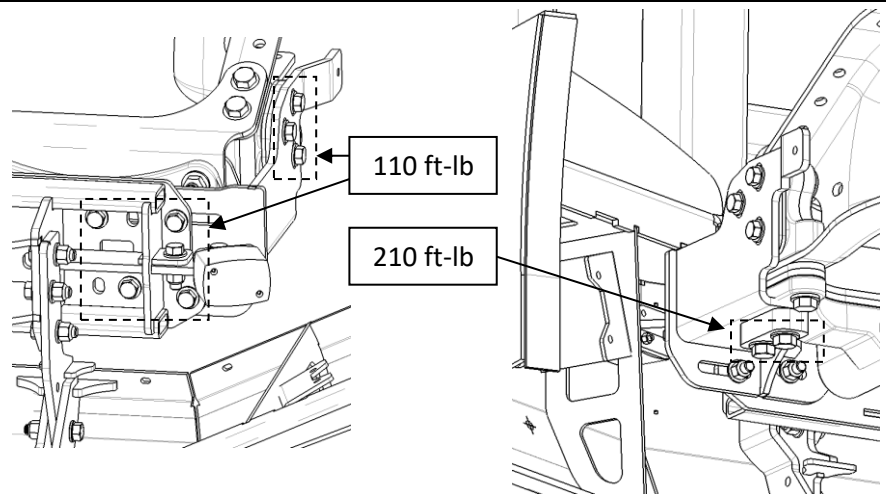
Bolt Torque Specs (Driver Side Shown).
